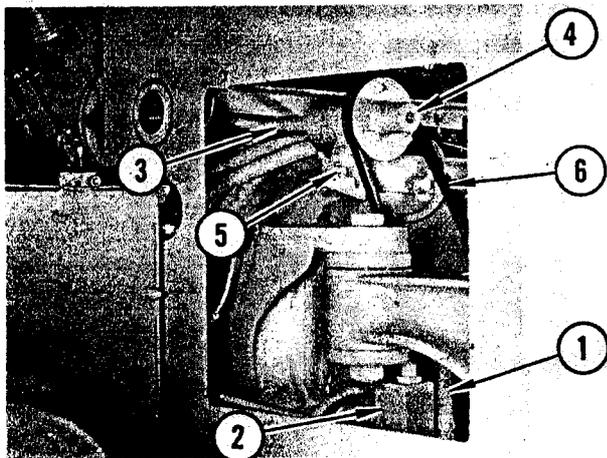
GOVERNOR DRIVE PULLEY REMOVAL (GM ENGINE)
